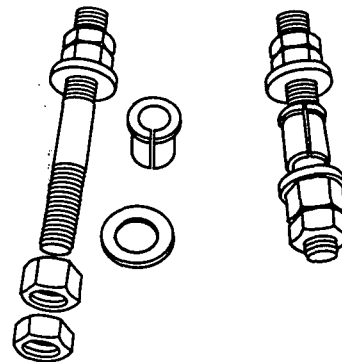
TWO OF THESE ASSEMBLIES ARE FURNISHED FOR EACH GEAR SPLIT.
